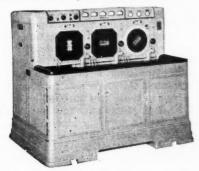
Completed TOCCO Induction Heating Machine with former base.
